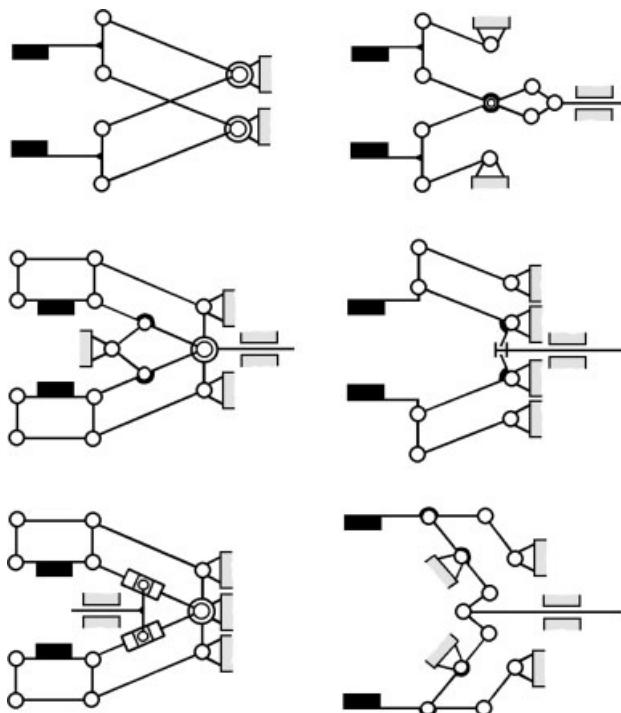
Gripper mechanisms with circular translation using slide and rotary joints.
